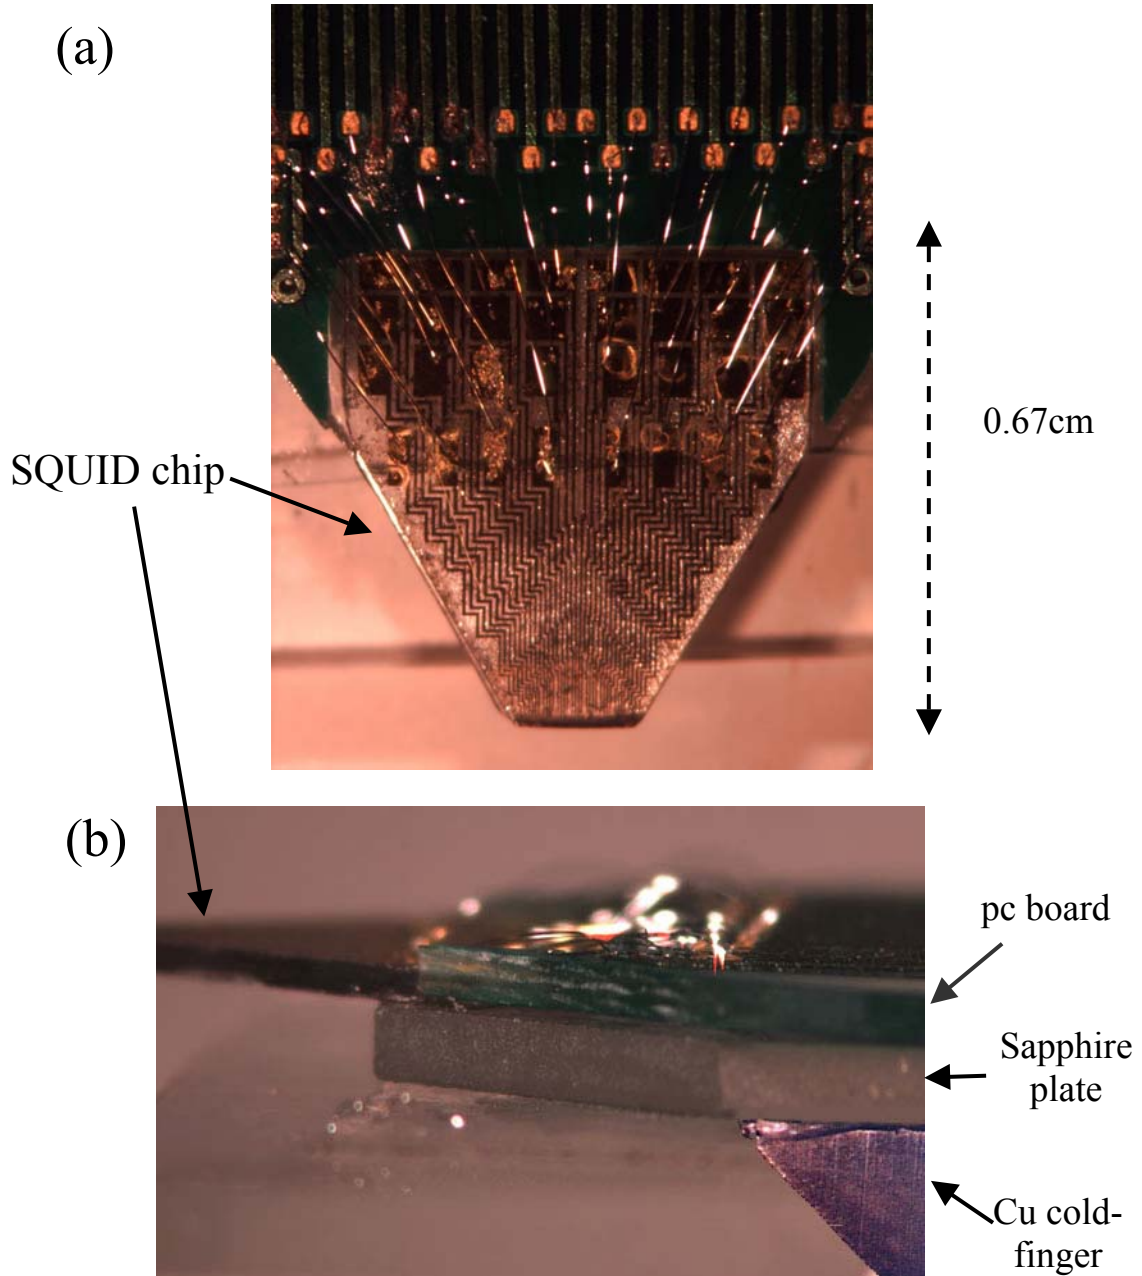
(a) SQUID chip after wire-bonding, (b) side view of SQUID chip assembly with sapphire board sitting on Cu cold-finger.
